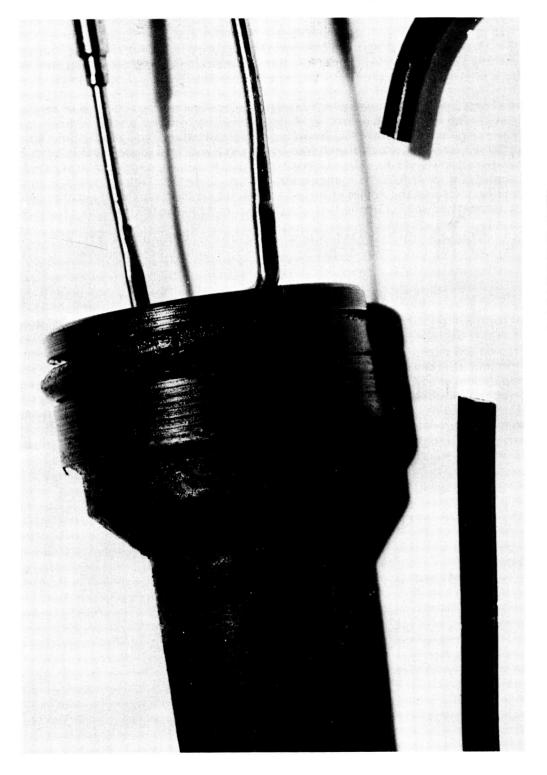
PHOTOGRAPH SHOWING MELTED FUEL INJECTOR HOLDER O-RING GASKET AFTER 95 HOURS OF LHR OPERATION
